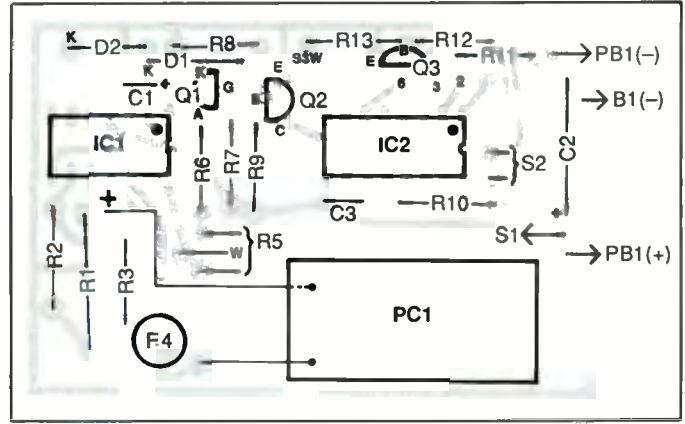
Wiring guide for printed-circuit board. Use this as a rough guide to component layout on perforated board.
